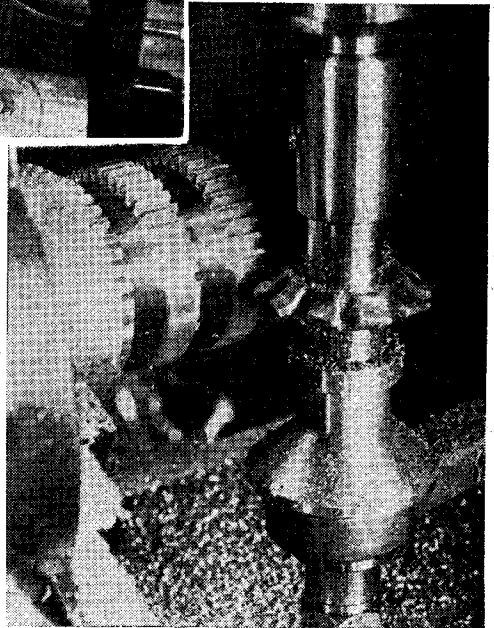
The outboard bearing and chip deflector fitted to the spindle
